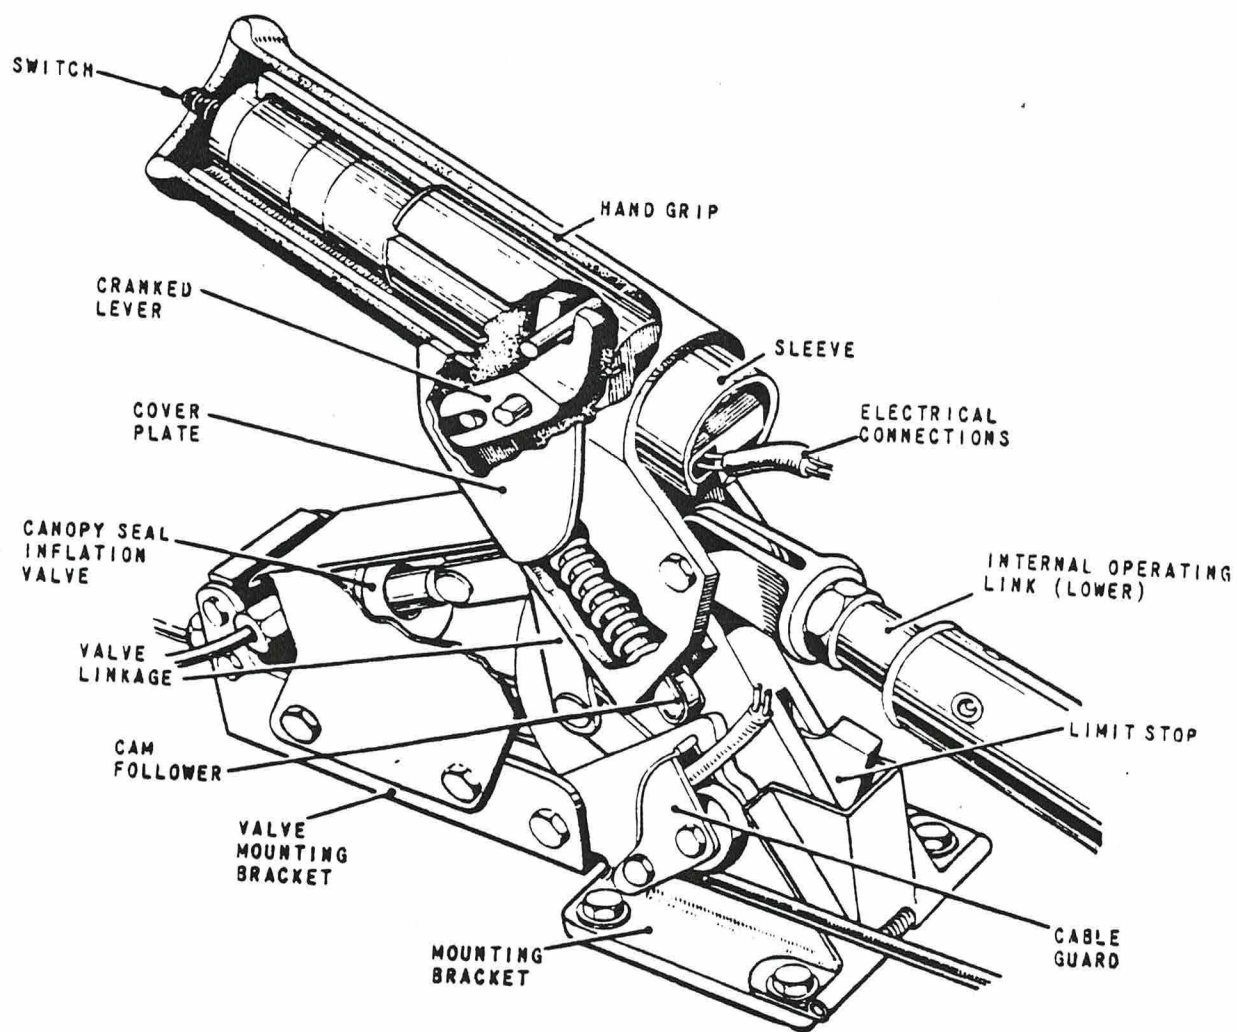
CANOPY LOCKING INTERNAL HANDLE
